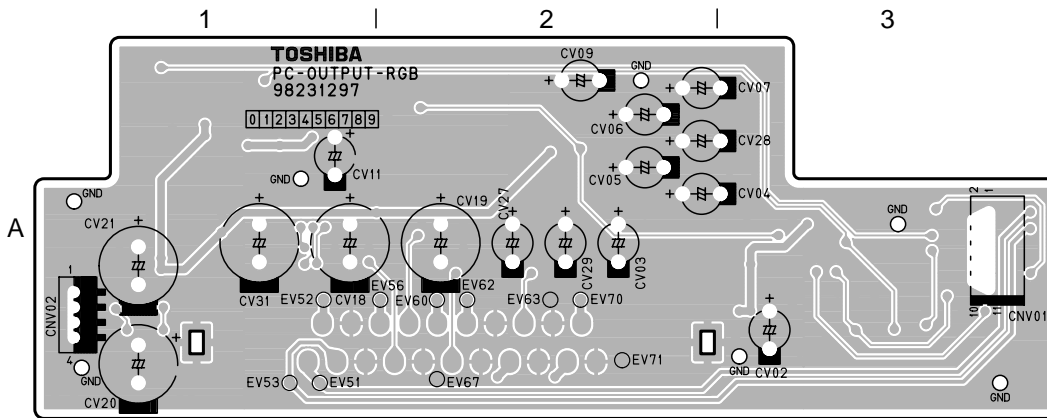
EU09 Output-RGB PC Board (Top side)
